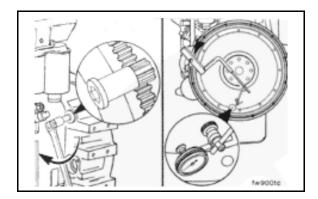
MEASURE THE FLYWHEEL RUNOUT
